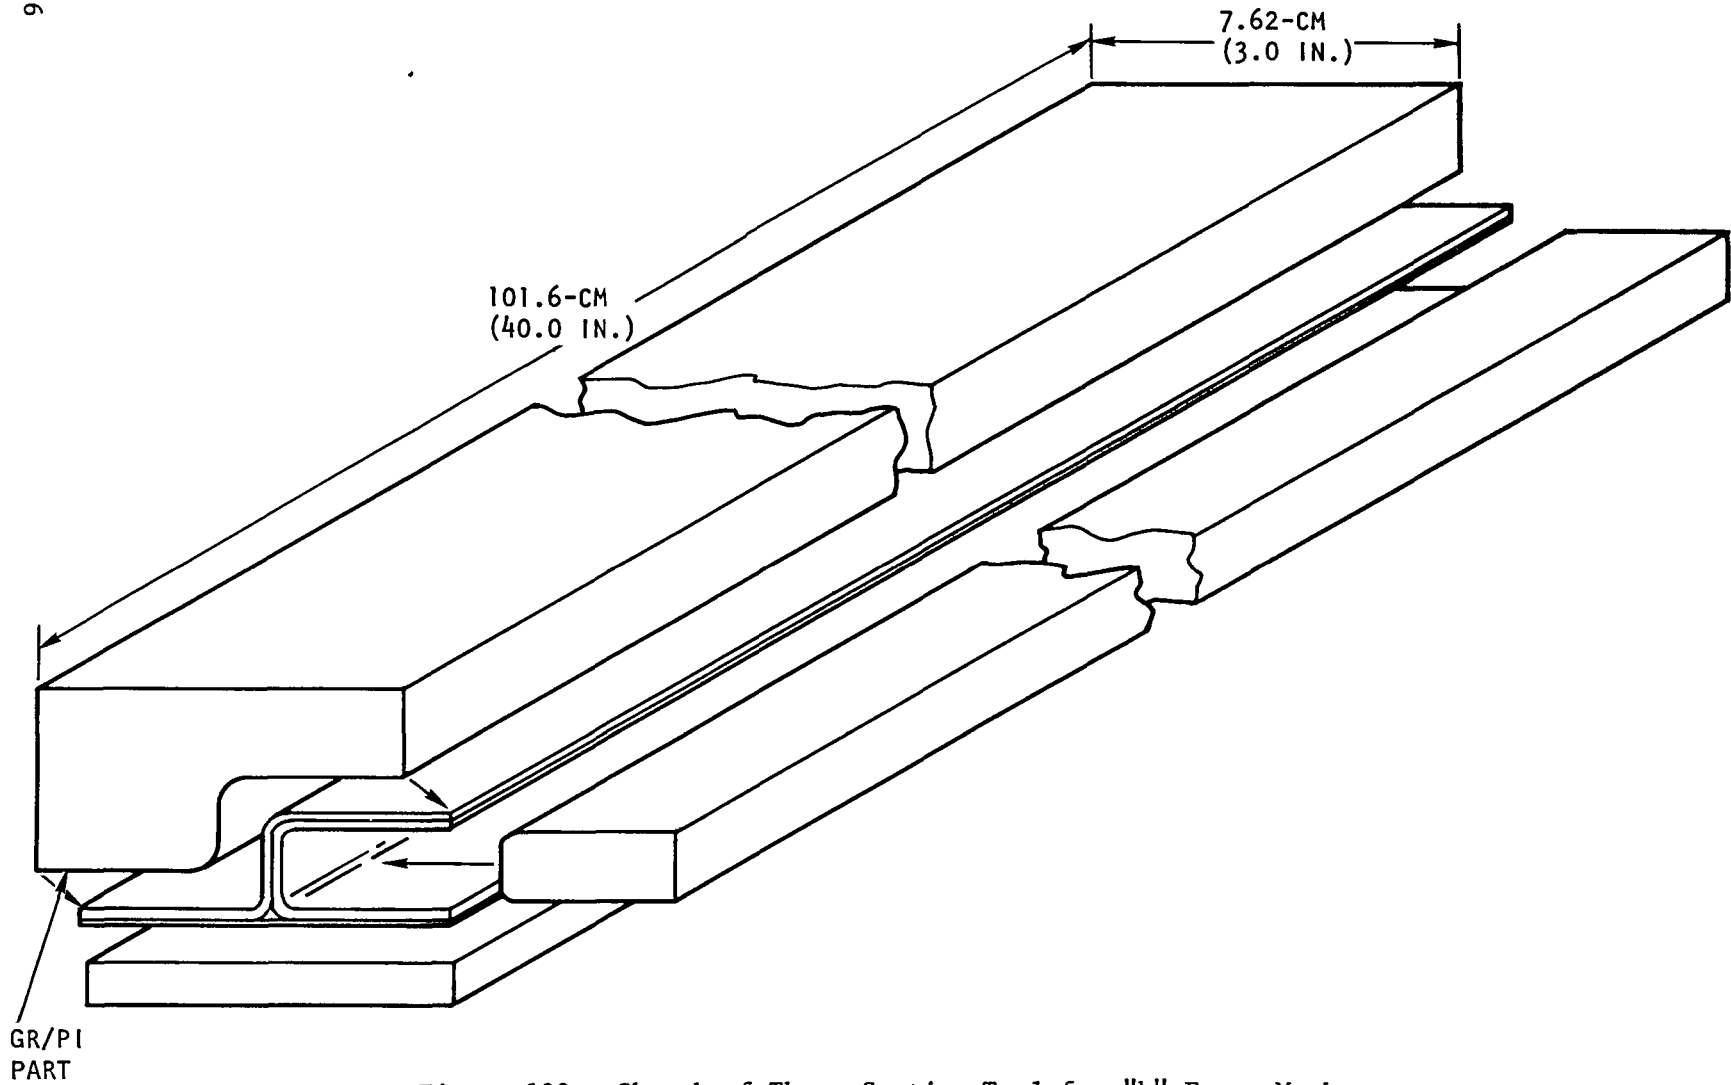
Sketch of Three Section Tool for "h" Frame Member
